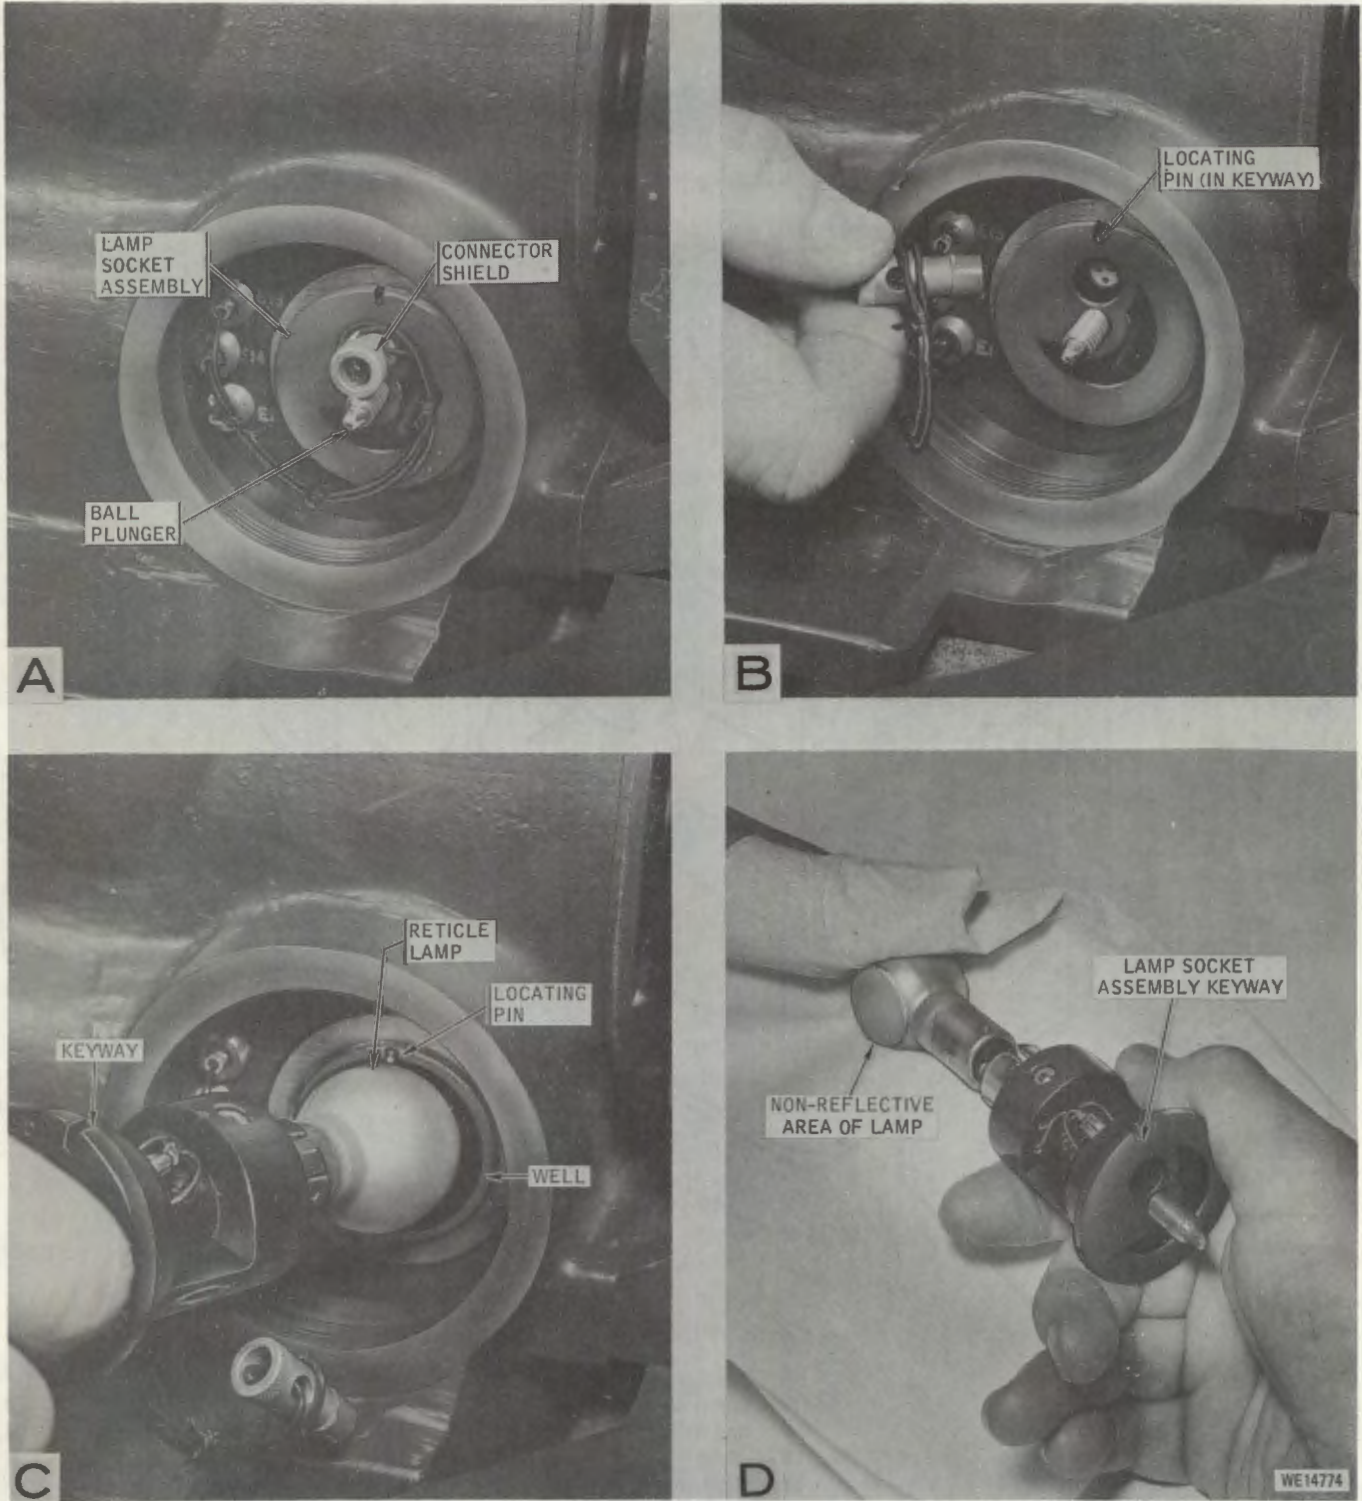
Sight reticle lamp socket assembly, removal/installation details.
